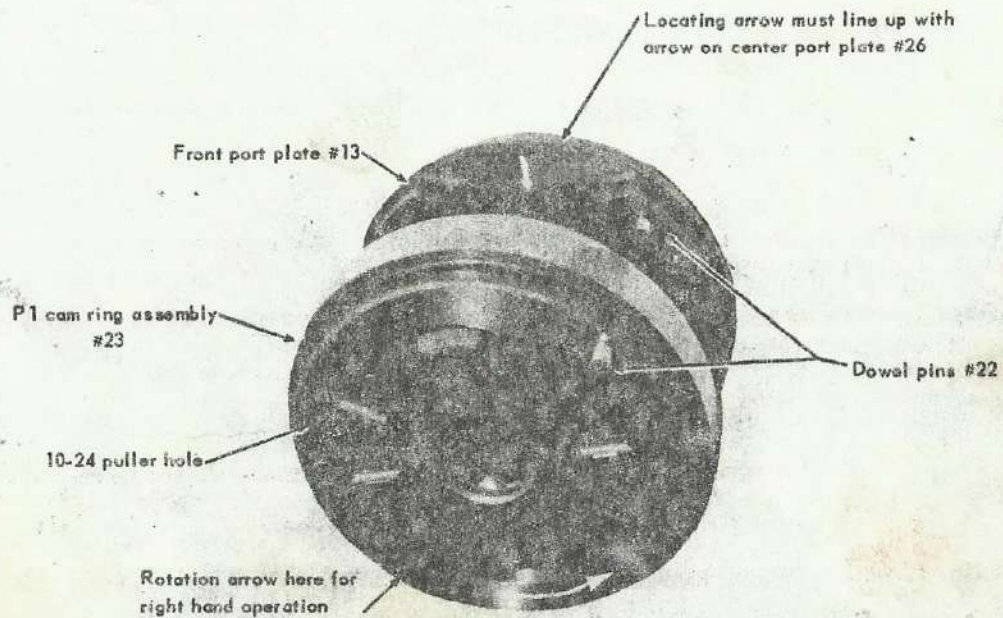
Above parts must be assembled in this manner in the mounting cap end over the pump shaft for right hand operation.
